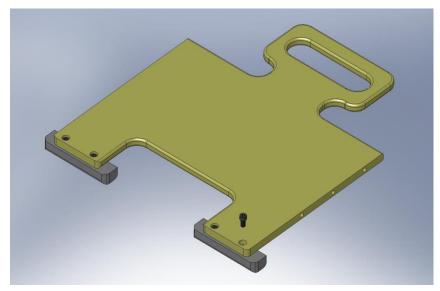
Slider-Stops mounted to bottom face of Install Base.
